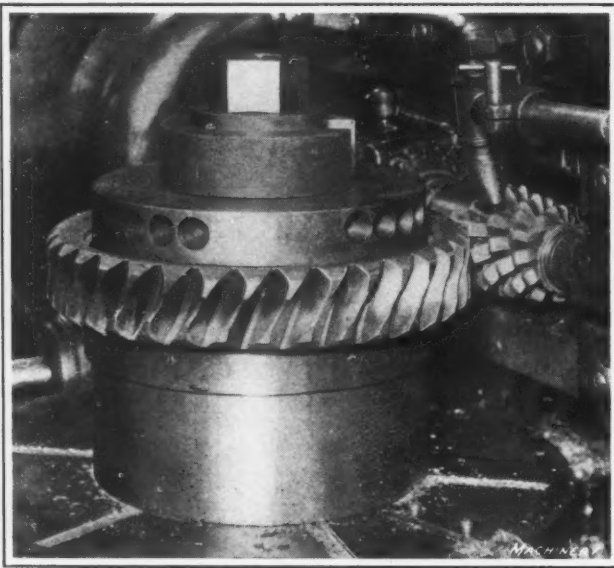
Gear Generating Machine equipped with a Special Hob that is fed tangentially across the Worm-wheel for roughing and finishing the Teeth
